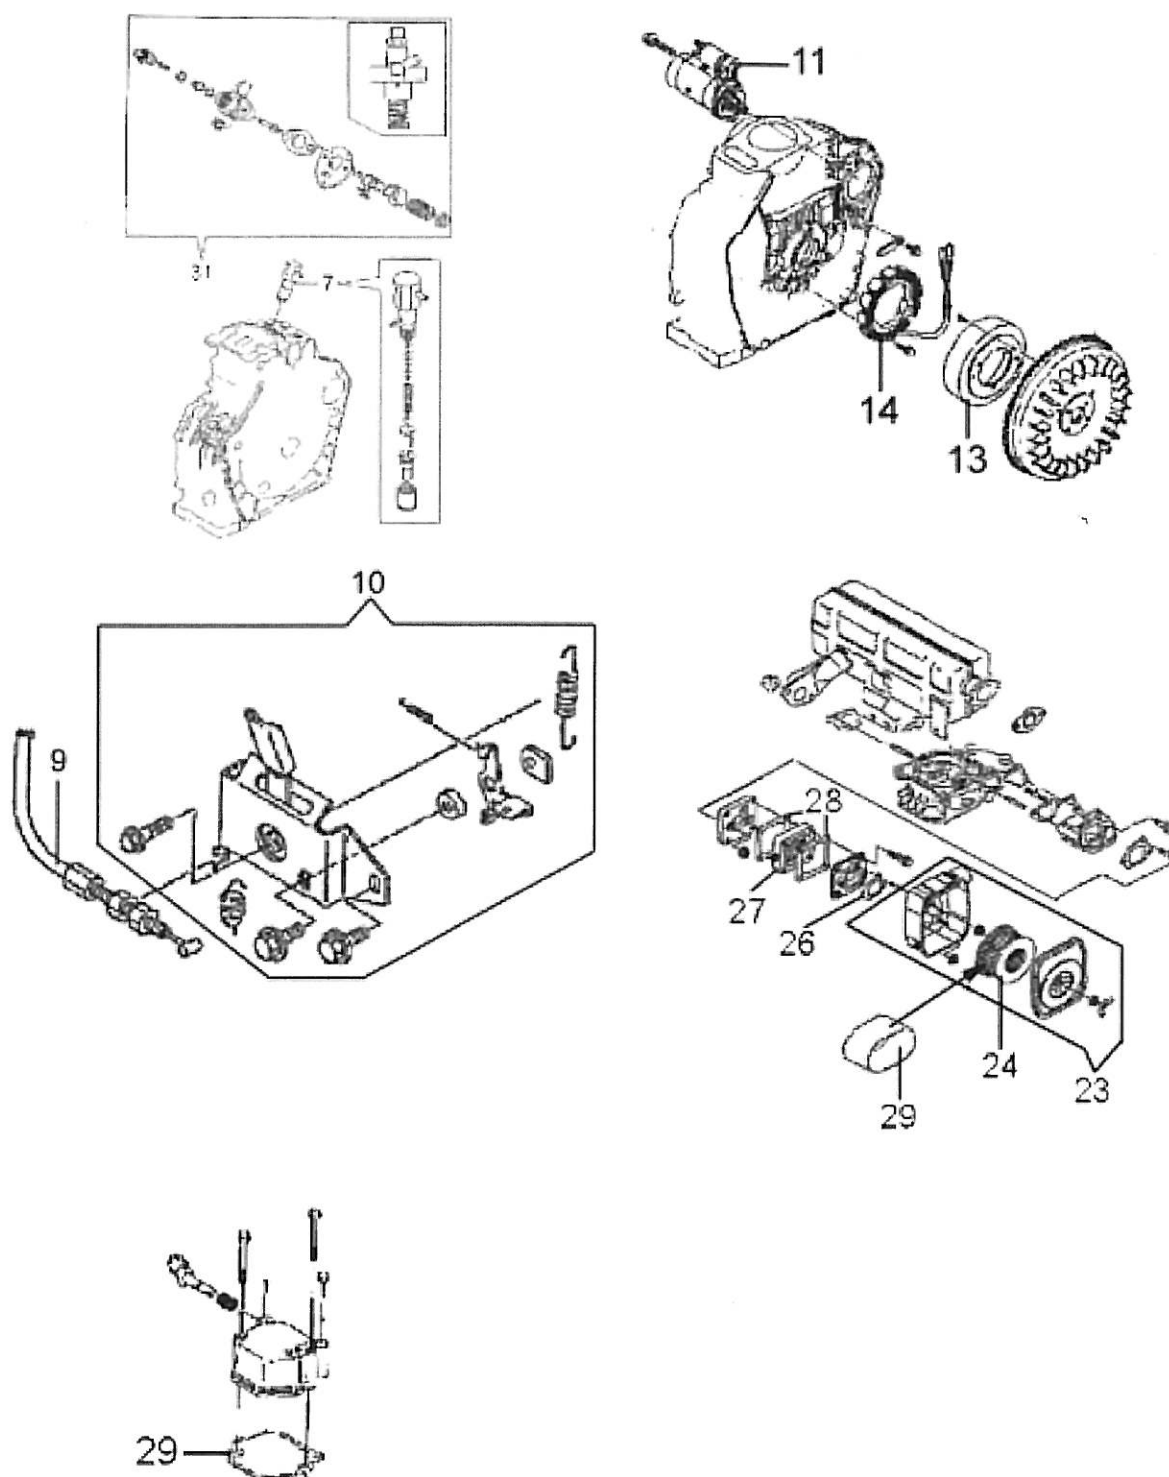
GENERATOR SET ASSEMBLY (SHEET 3)
